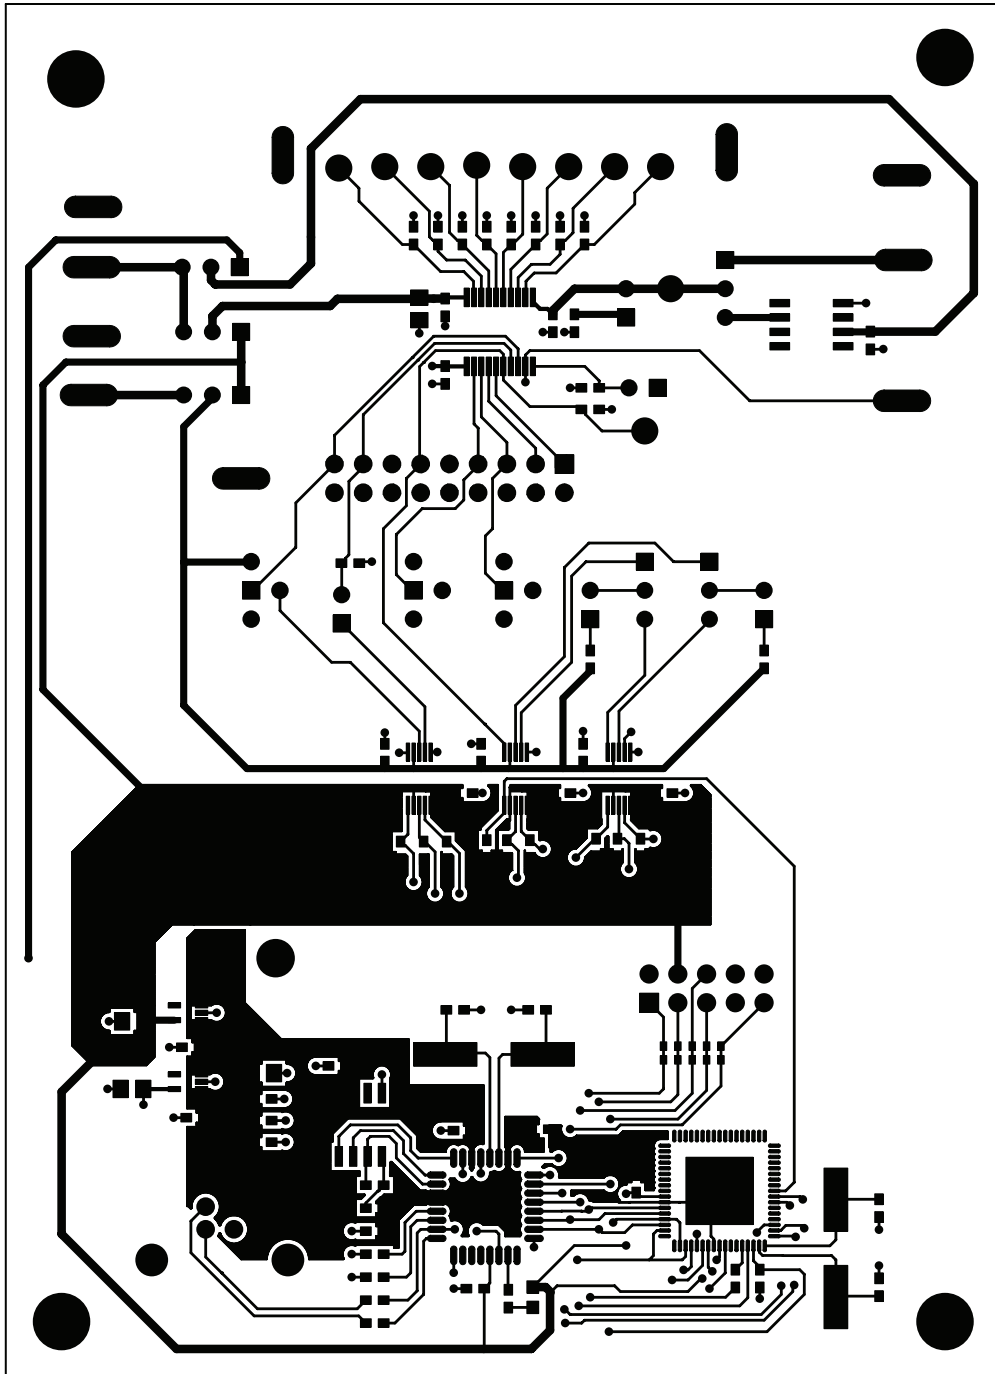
MAX5825A EV Kit PCB Layout—Component Side
